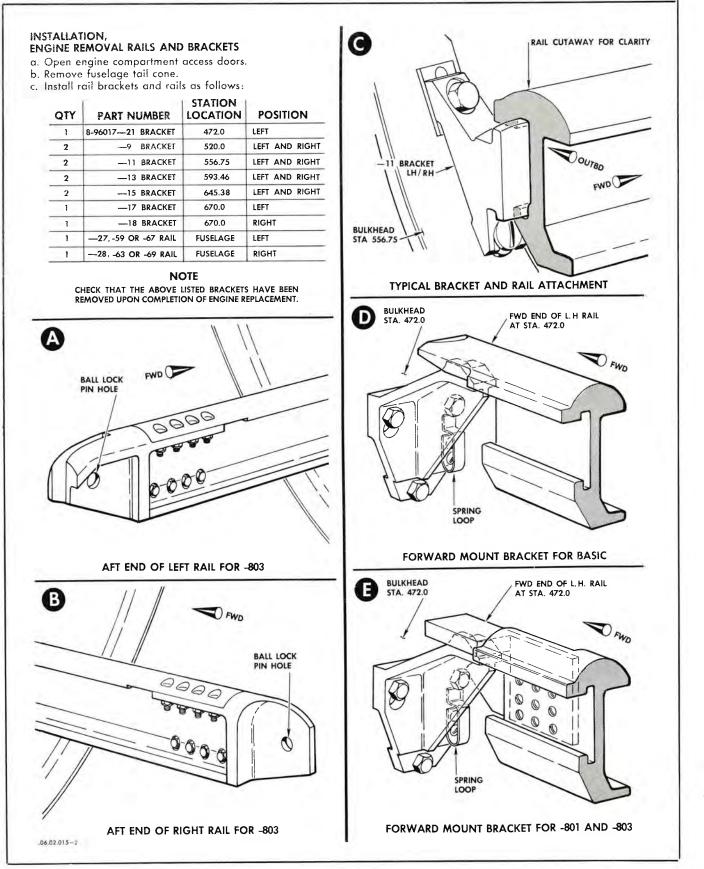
Engine Replacement, Rail and Bracket Installation, 8-96017 Basic, -801, -803 (Sheet 2 of 2) Applicable to F-106A airplanes 57-246 thru 58-798, and F-106B airplanes 57-2516 thru 57-2541
